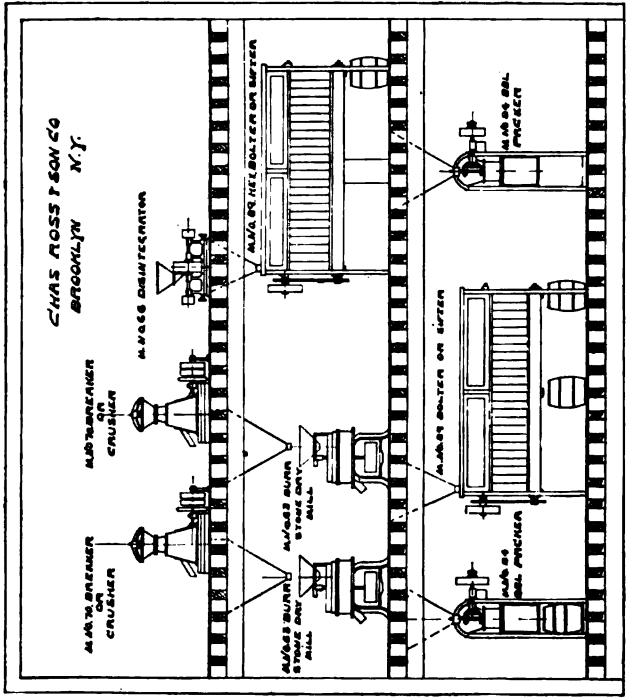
Arrangement for Crushing, Grinding, Sifting and Packing.
